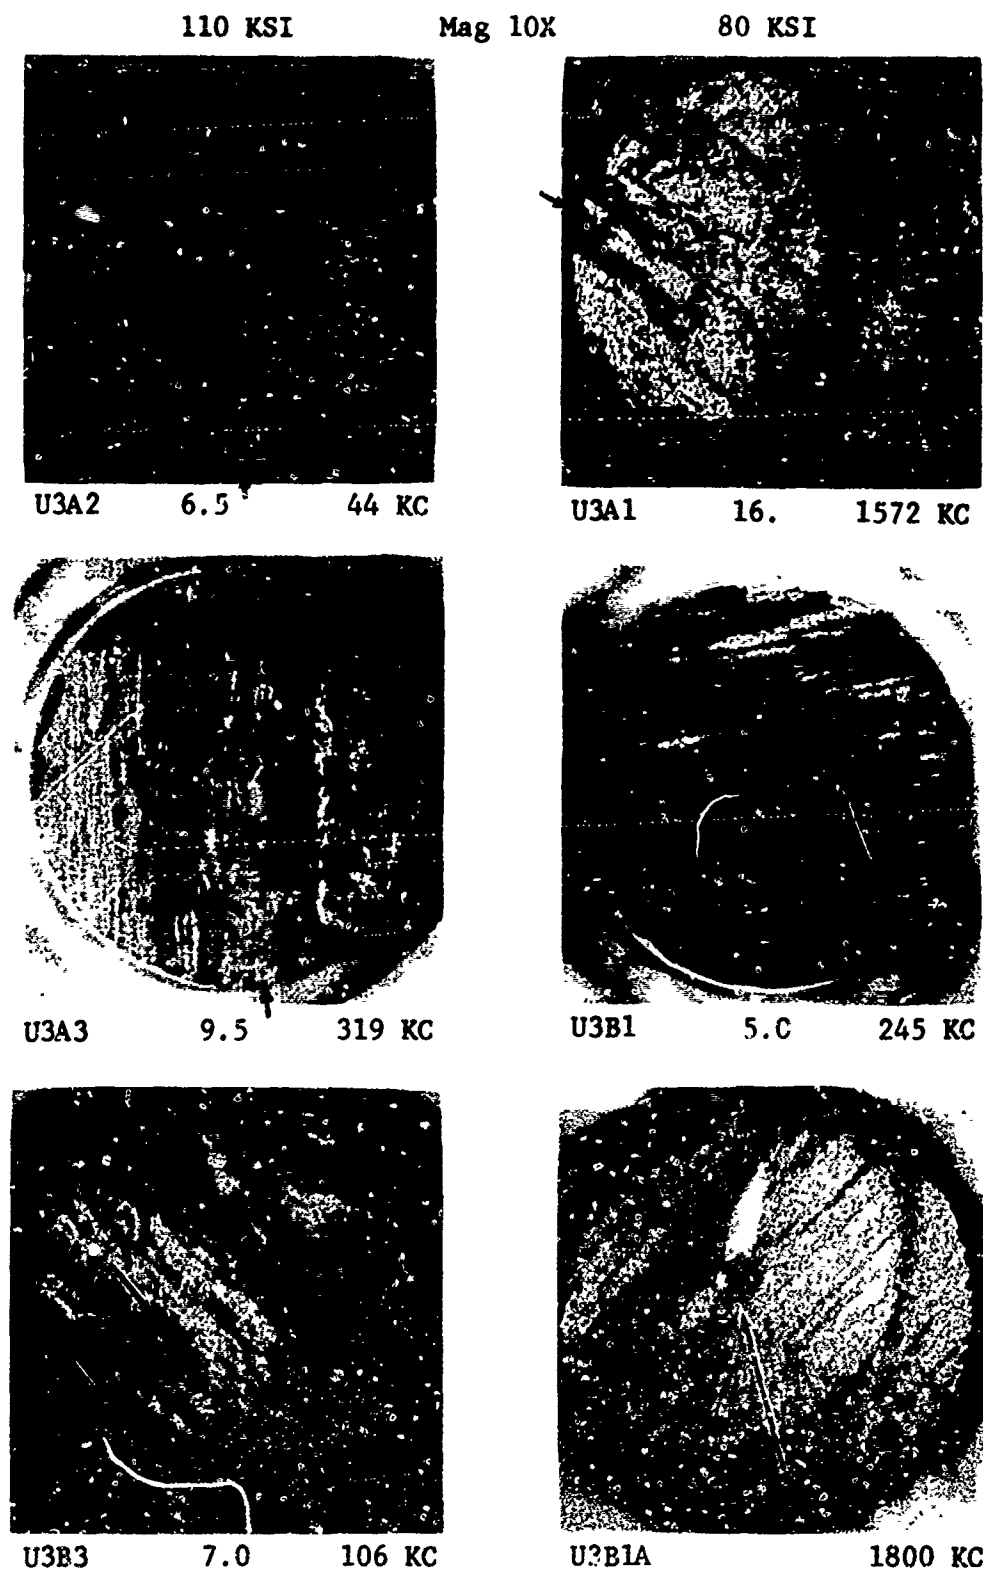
Fracture Surfaces of Failed Fatigue Specimens Series U3-
